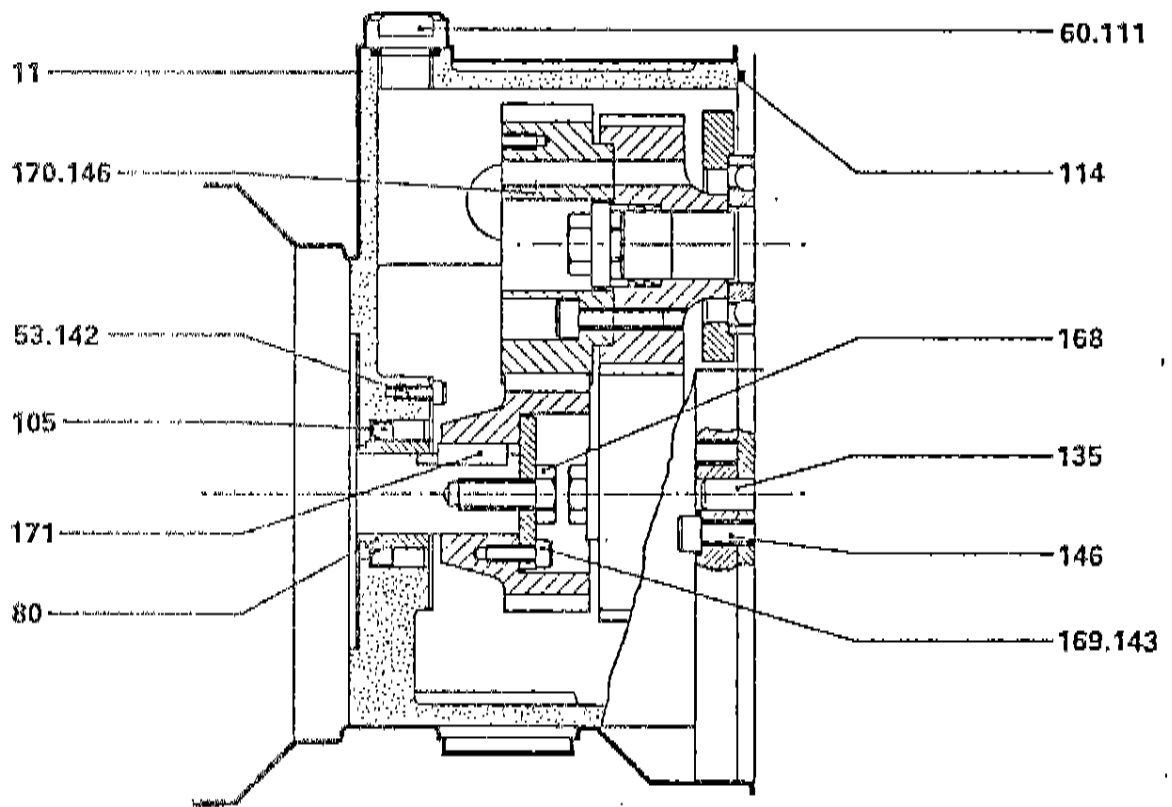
DP80 'DRY' PUMP DRIVE GEAR ASSEMBLY - 60HZ
